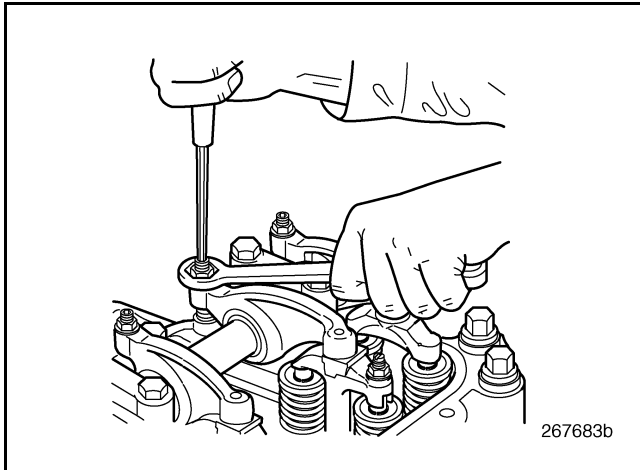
Loosening Exhaust Rocker Arm Locknut and Backing Out Adjusting Screw
